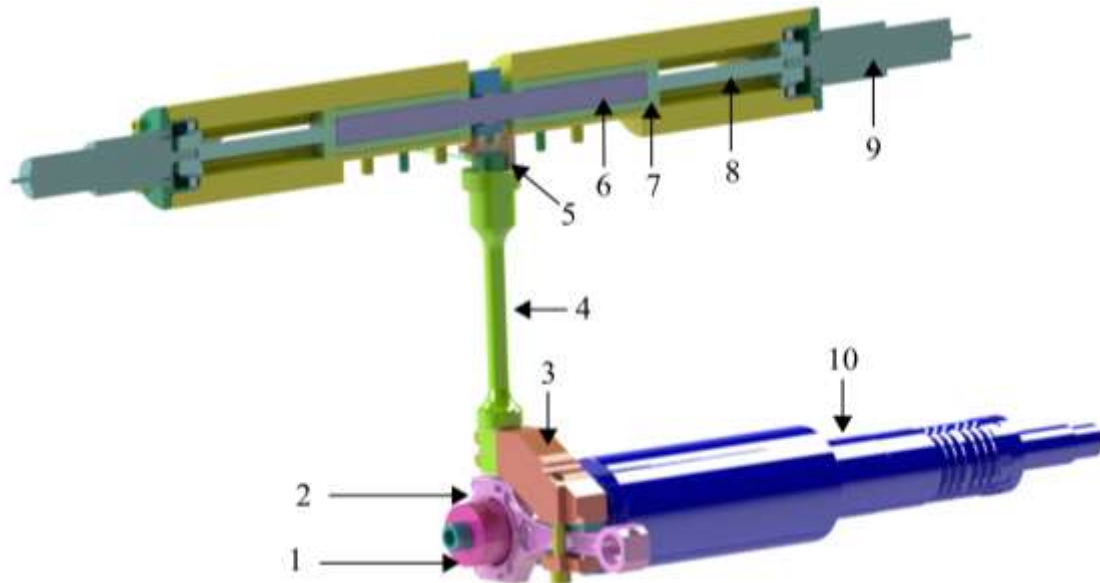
MEGAPASCALE transversal locking system 1. Journal; 2. Connecting rod; 3. Clamp; 4. Rigid rod; 5. Force sensor; 6. Beam; 7 Brass Bushing; 8. Screw; 9. Motor; 10. Shaft
